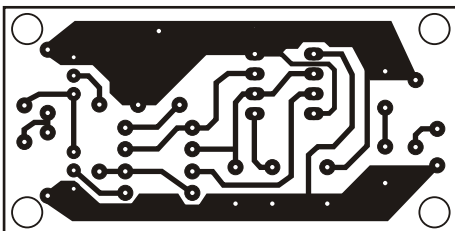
Actual - size, solder-side PCB layout of Transmitter.
